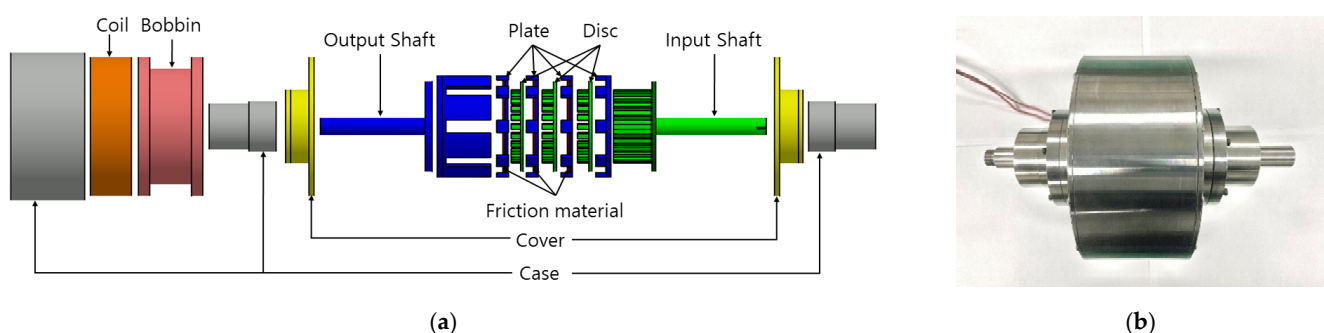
Diagram of the MR fluid multi-plate clutch. (a) An exploded CAD model of an MR fluid multi-plate clutch. (b) Prototype MR fluid multi-plate clutch.
